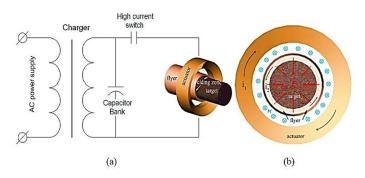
Schematic of MPW system for tubular welding. (a) Electric circuit for welding system, (b) Induced electromagnetic field and repulsive force acting on the flyer tube. i1 is primary current in actuator and i2 is induced current in flyer. (Zhang, Y., 2010)
